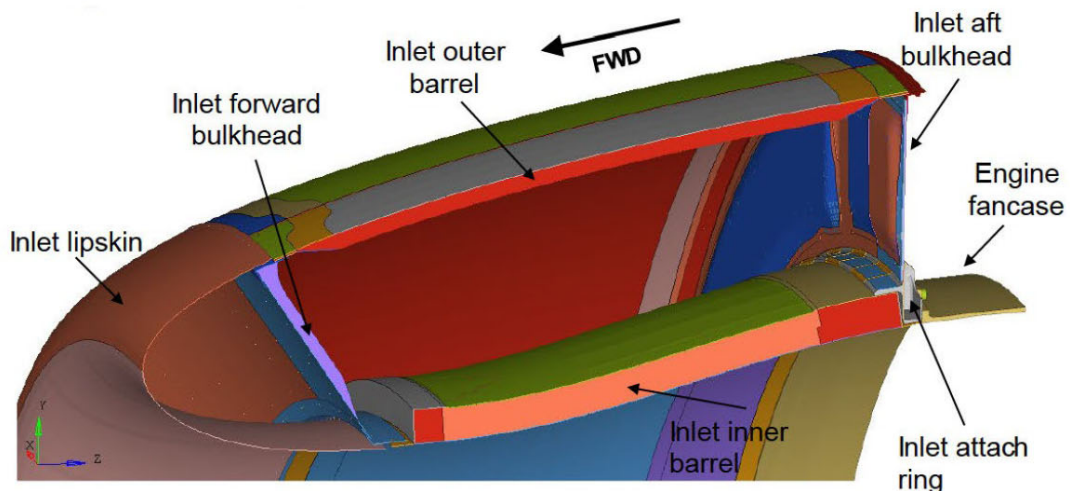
Inlet Cross Section for PW4000 powered 777-200
